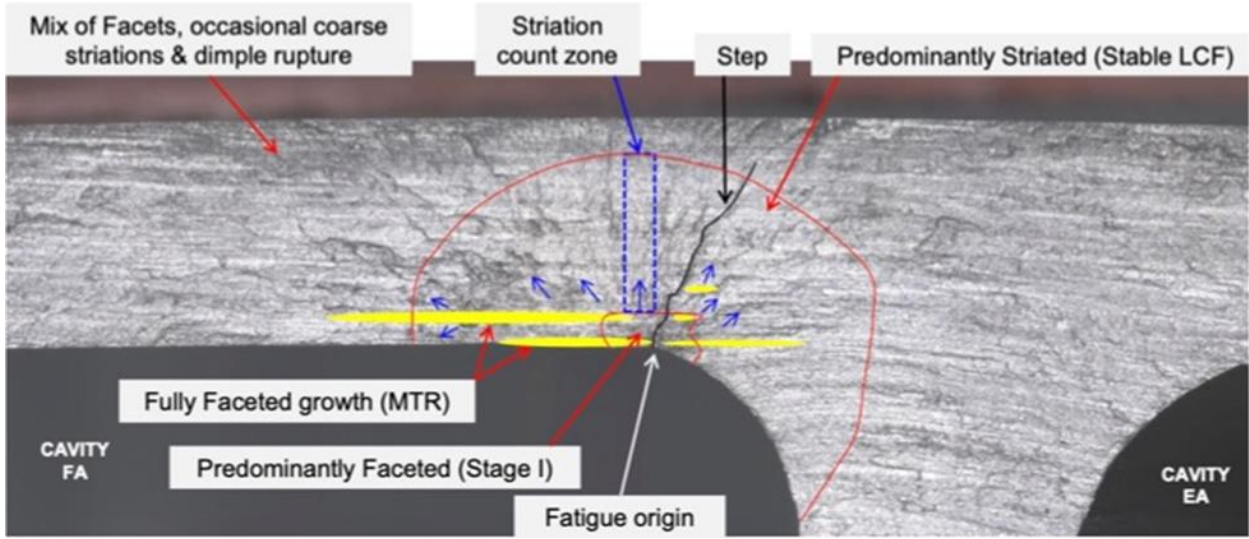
Fracture surface from PW4077 fan blade out event
